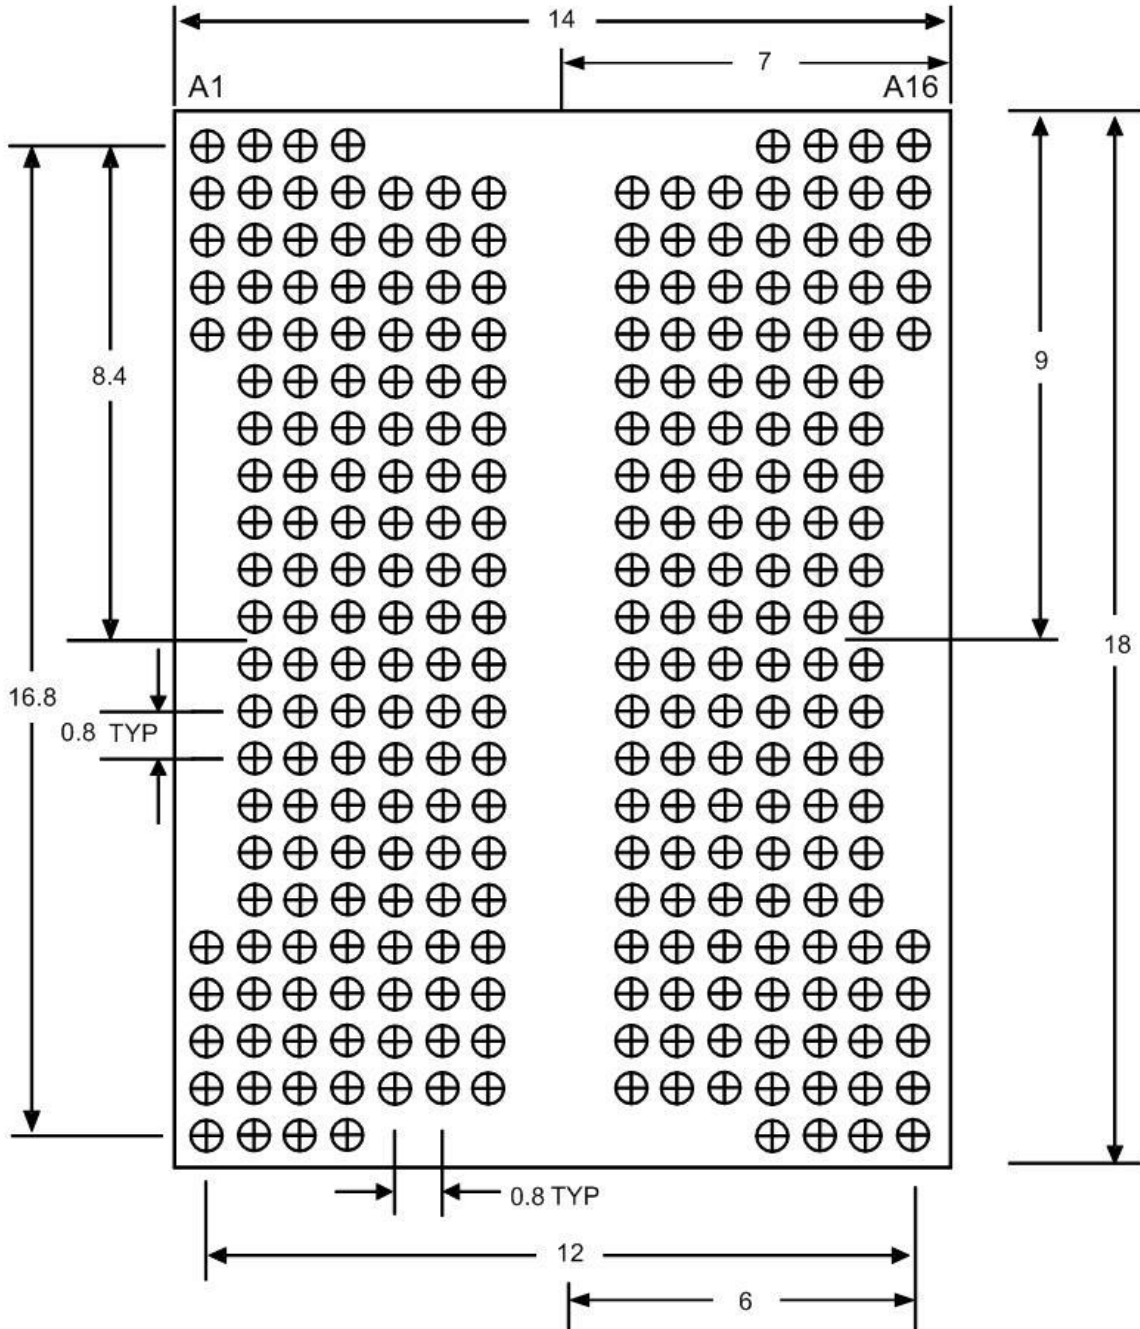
BGA-272 and BGA-252 ball spacing requirements (top view, dimensions in millimeters)
